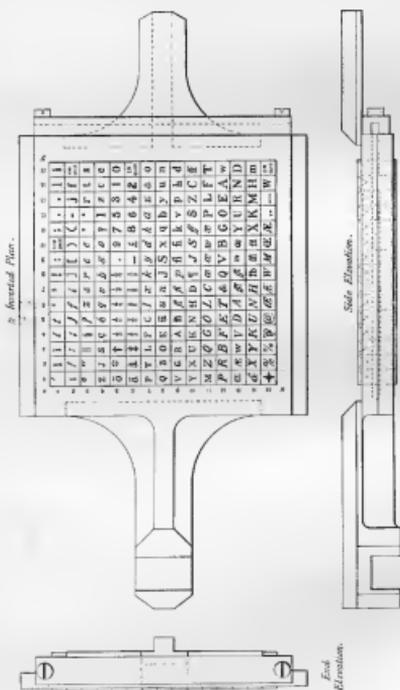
Monotype composing and casting machine: matrix-plate.
